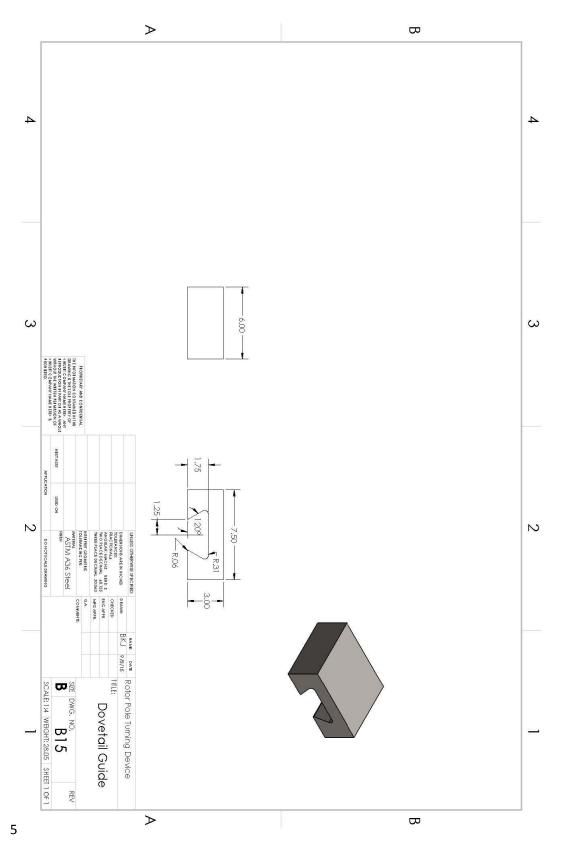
DRAWING OF DOVETAIL GUIDE
